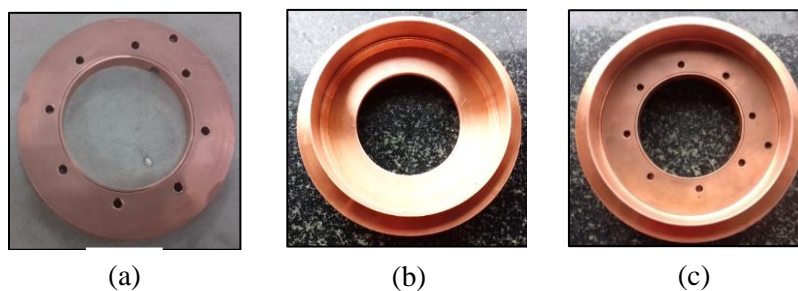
Photographs of (a) 1ststage adapter flange with insert, (b) 1ststage cryostat flange, (c) Assembly of both 1ststage flanges.
